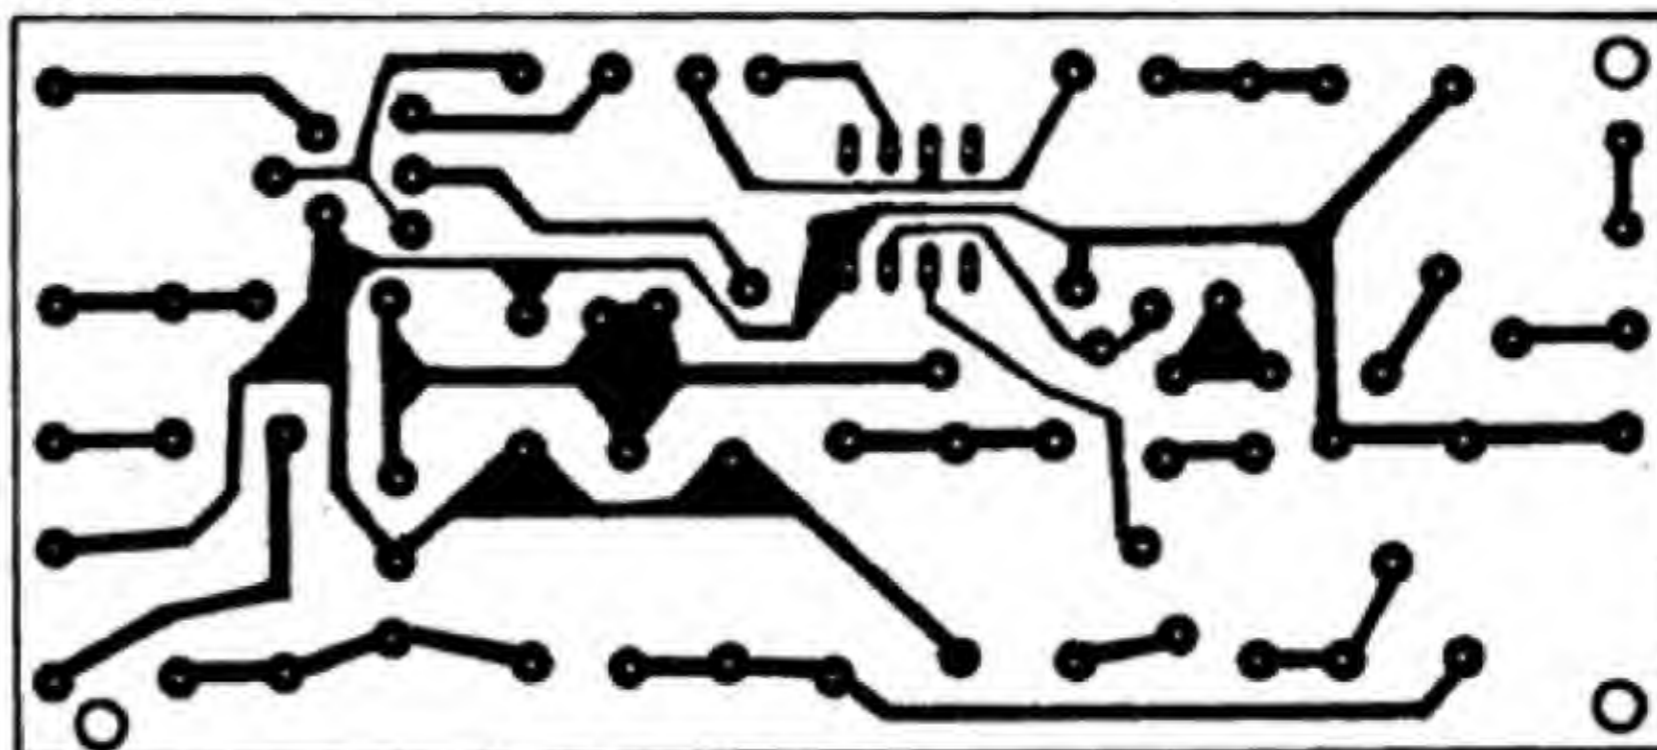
Actual-size PCB layout for refrigerator temperature controller.
